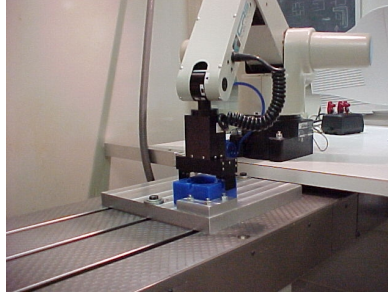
Robot Preparing to Remove Part from Clamping Device.
